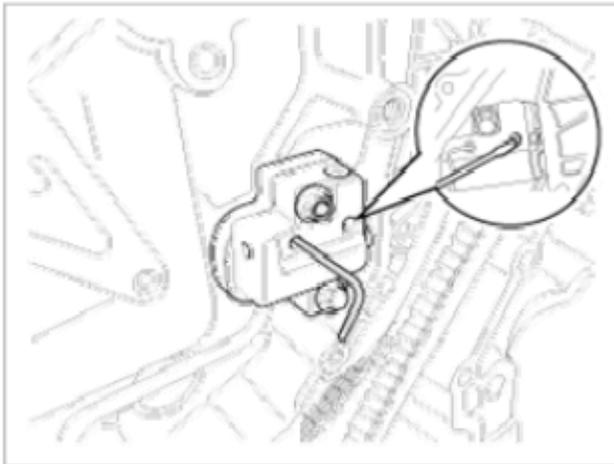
Installing Set Pin After Compressing LH Timing Chain Tensioner
